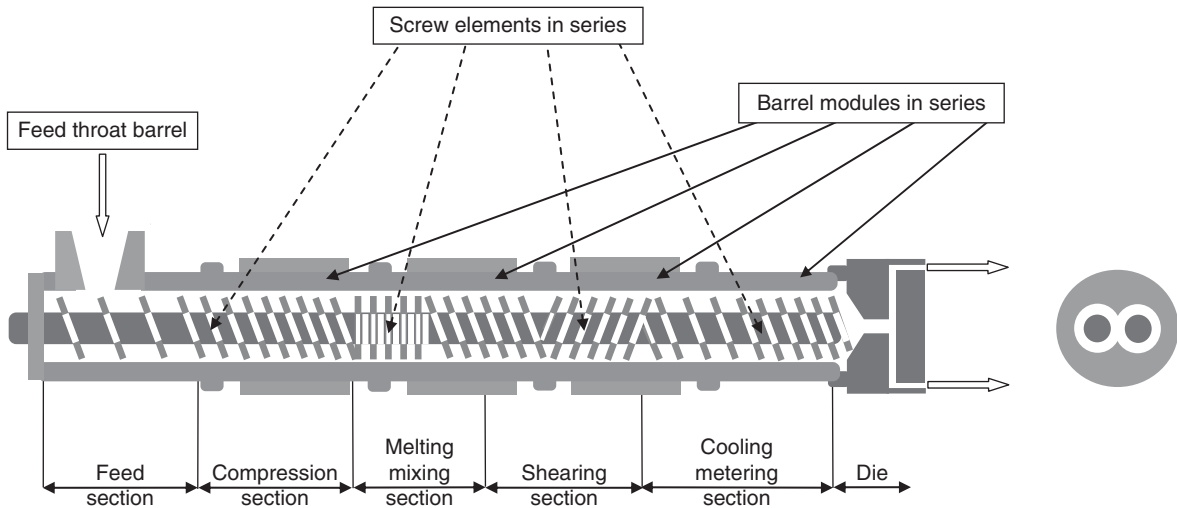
Schematic view of a 'modular' screw-barrel assembly with operating sections.
